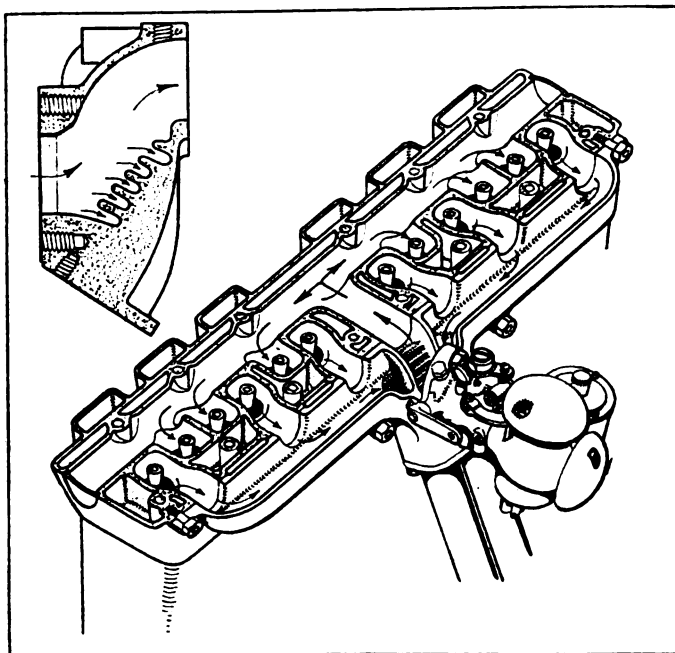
CROSS-SECTIONS OF THE CYLINDER-HEAD AND THE HOT-SPOT GRID
